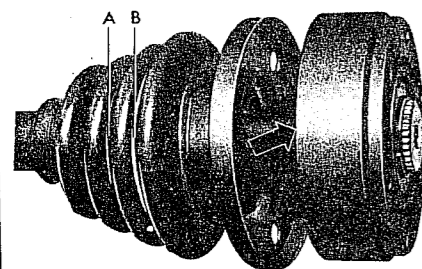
The larger diameter of the C/V joint must face the rubber joint cap.
